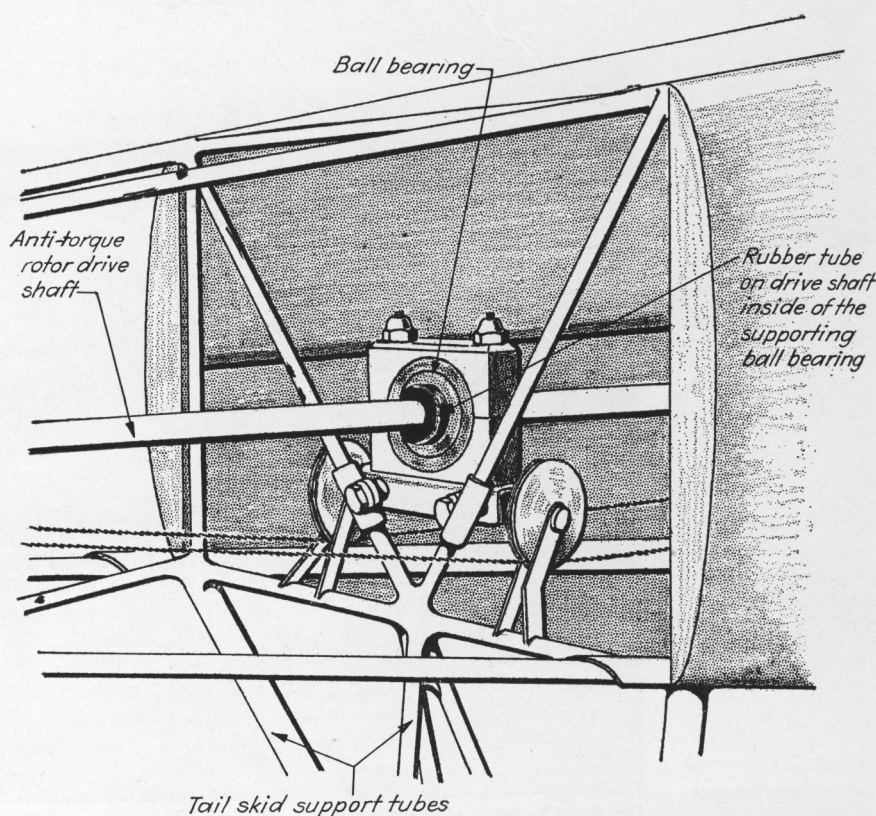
A simple method of supporting the tail-prop drive shaft. Five of these ball bearings are used between the main and the tail gearboxes. The tail-prop feathering (rudderlike) control is operated by two cables which are guided by sheaves attached to the fuselage.
